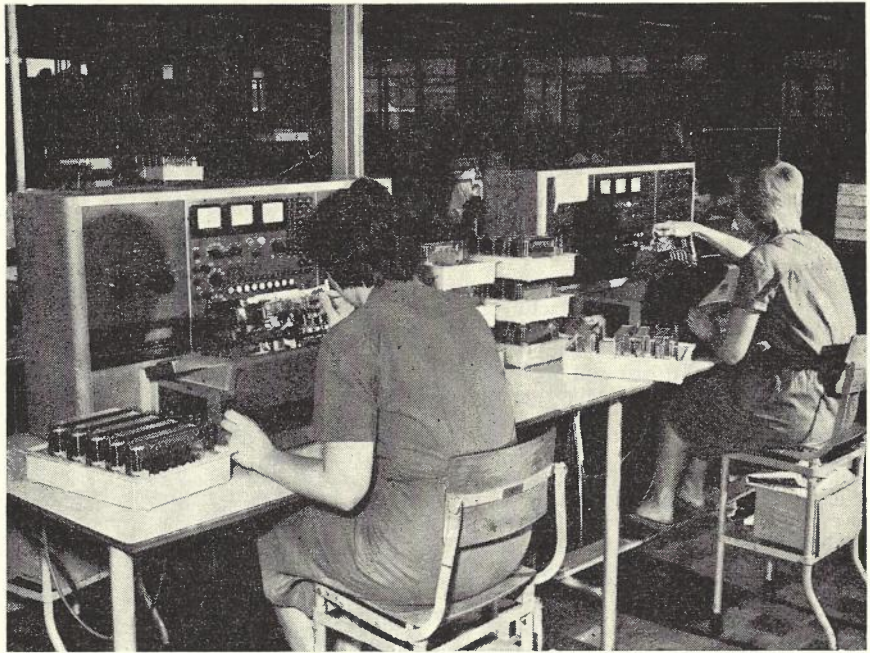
Testing and Adjustment of Crossbar Switch Vertical Units.
